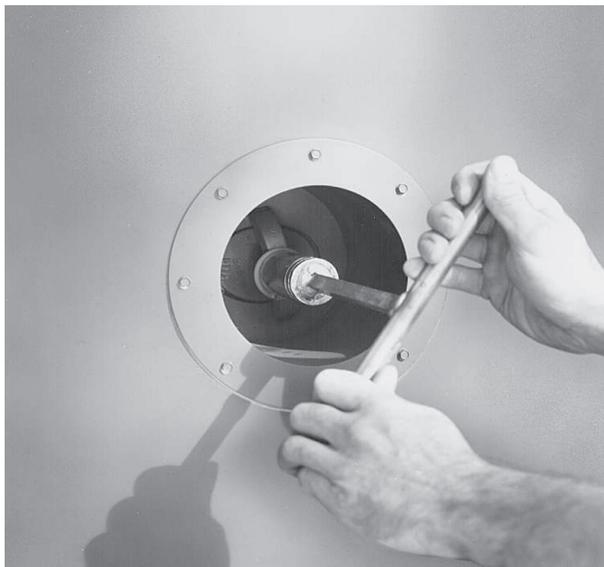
REMOVE ASSEMBLY WITH TEE HANDLE WRENCH
